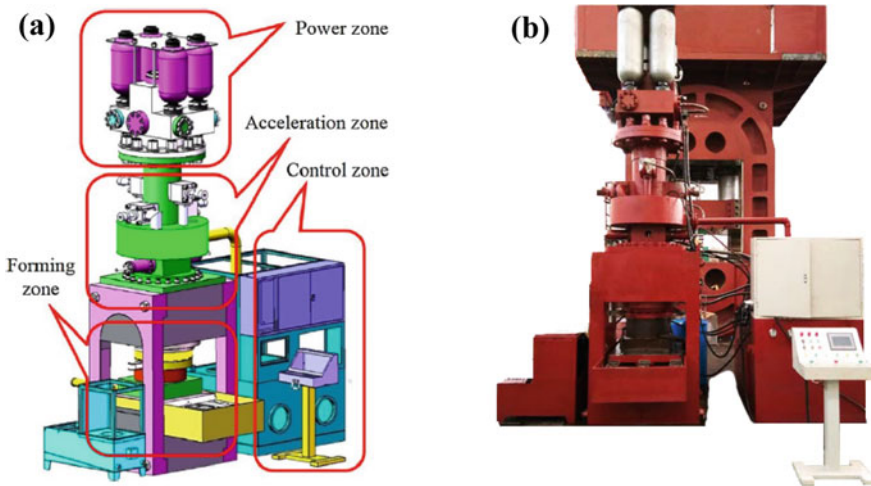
a The schematic description forming, b actual setup of IHF machine
